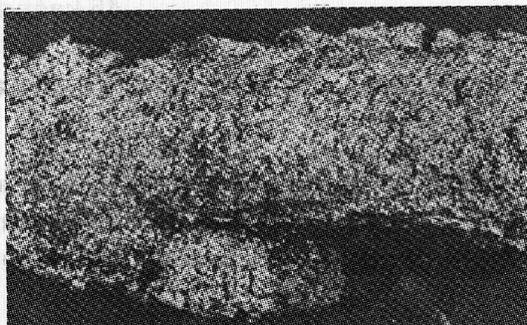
Macro photo of failed part indicating brittle fracture $\times 1.1$
